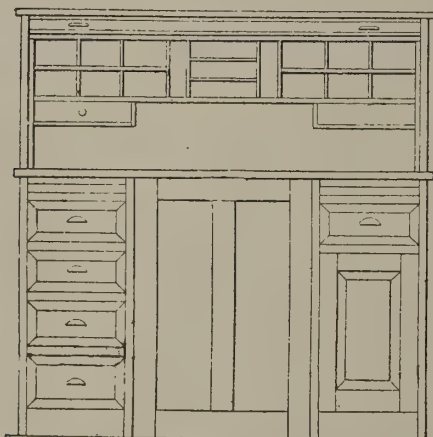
Front Elevation of Desk Showing Roll Top Open—Scale 9/16 In. to the Foot
